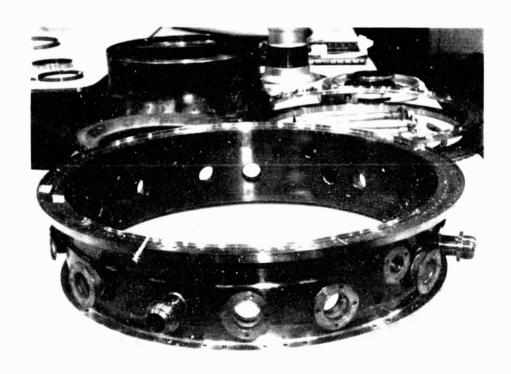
High-Pressure Turbine Outer Diameter Inlet Case
